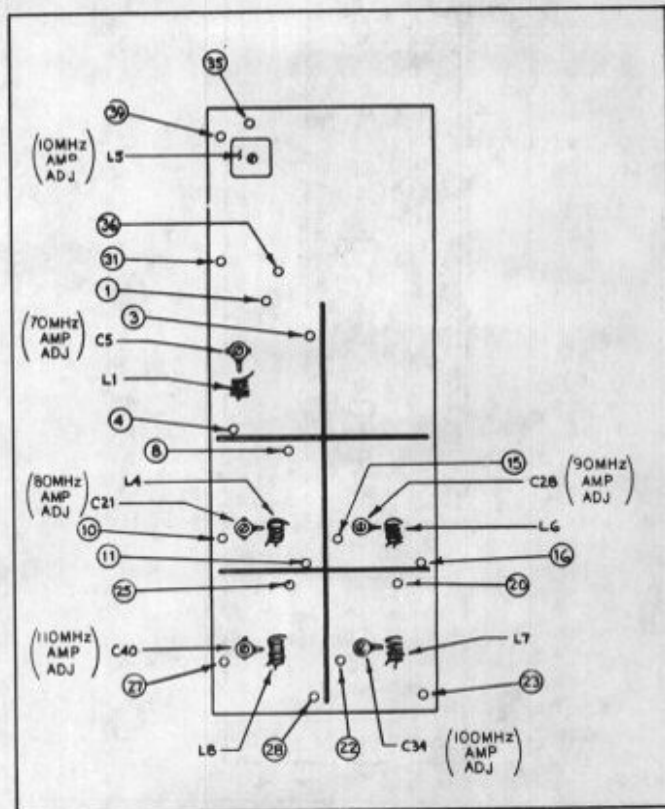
Trimmer Locations, Buffer Amplifier Assembly, A11
